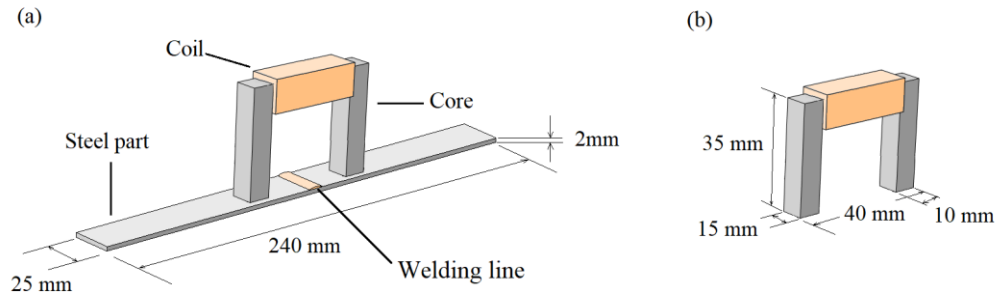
The configuration and designed dimensions of the welded specimen and the coil for the stress relief test. The coil makes direct contact with the central area of the steel specimen.
